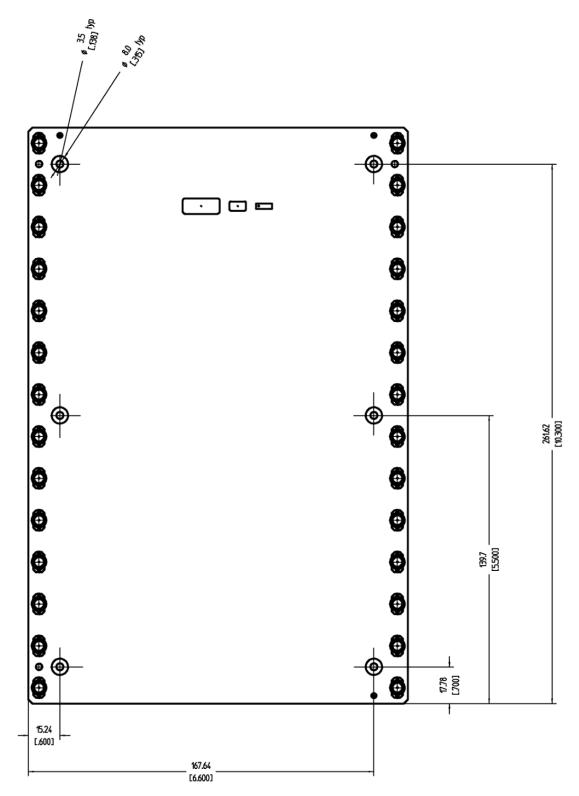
Mechanical drawing of M8049A-003 ISI channel boards with position of fastening holes.
